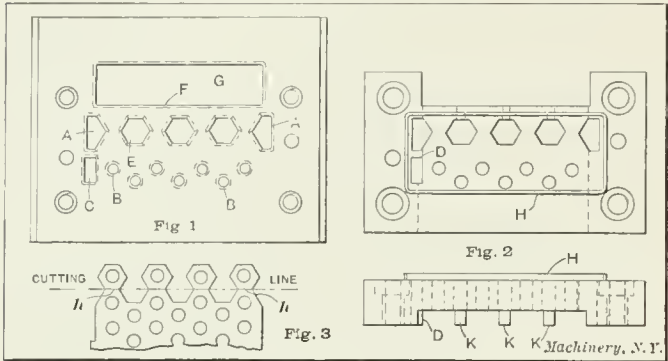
Plan View of Die-block showing how Punches are laid out to save Stock. Fig. 2. Plan and Elevation of Stripper-plate showing Stops for Gaging the Stock to Length. Fig. 3. Condition of the Sheet after the Third Stroke of the Press
